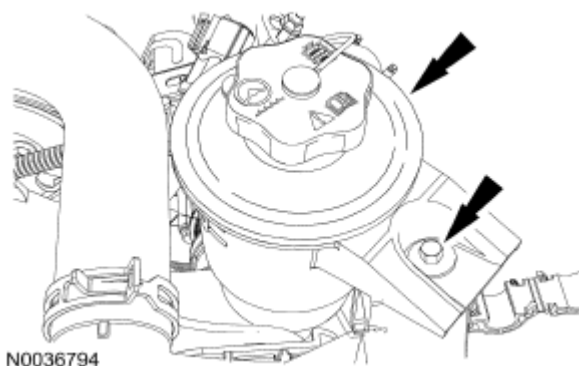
Identifying Power Steering Fluid Reservoir And Bolt
